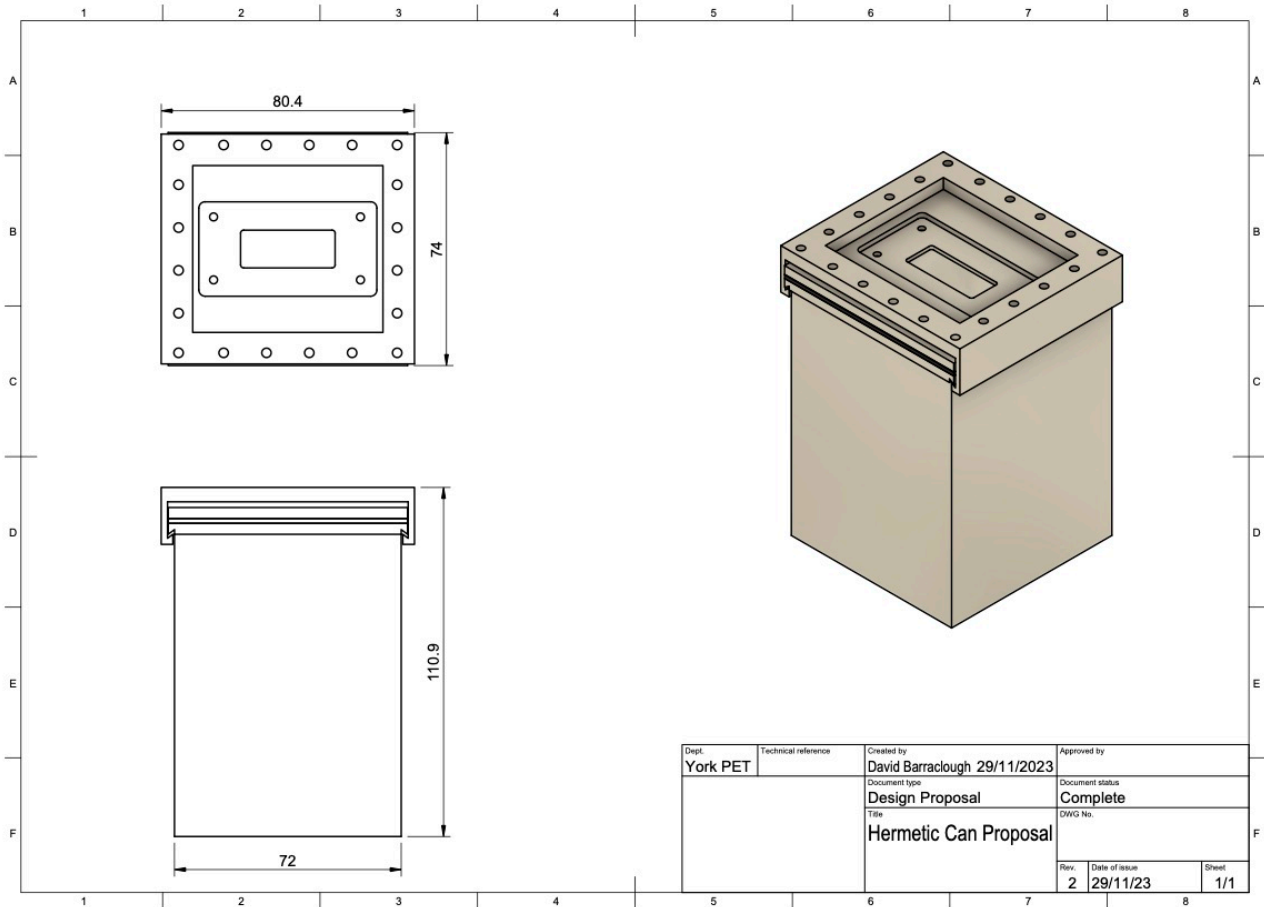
Drawing of proposed housing redesign using a single piece sliding clamp. The top view and side view are shown with dimensions labelled.
